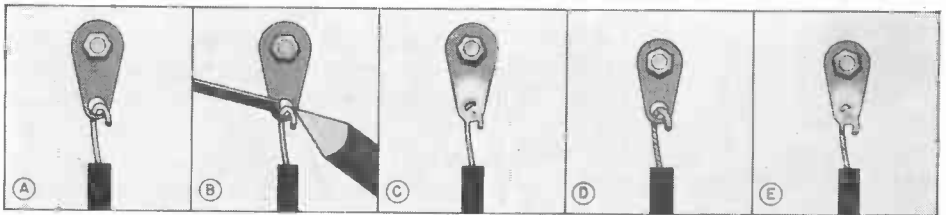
Temporary connections to soldering lugs. A—Temporary hook joint to a soldering lug with solid wire, before soldering; B—Method of soldering a hook joint on a soldering lug. Note that the soldering iron is held on top of the lug, on one side of the wire, and solder is applied to the other side of the wire; C—Your temporary hook joint with solid wire should appear like this after soldering; D—Temporary hook joint with stranded wire, before soldering; E—Temporary hook joint with stranded wire, after soldering.
